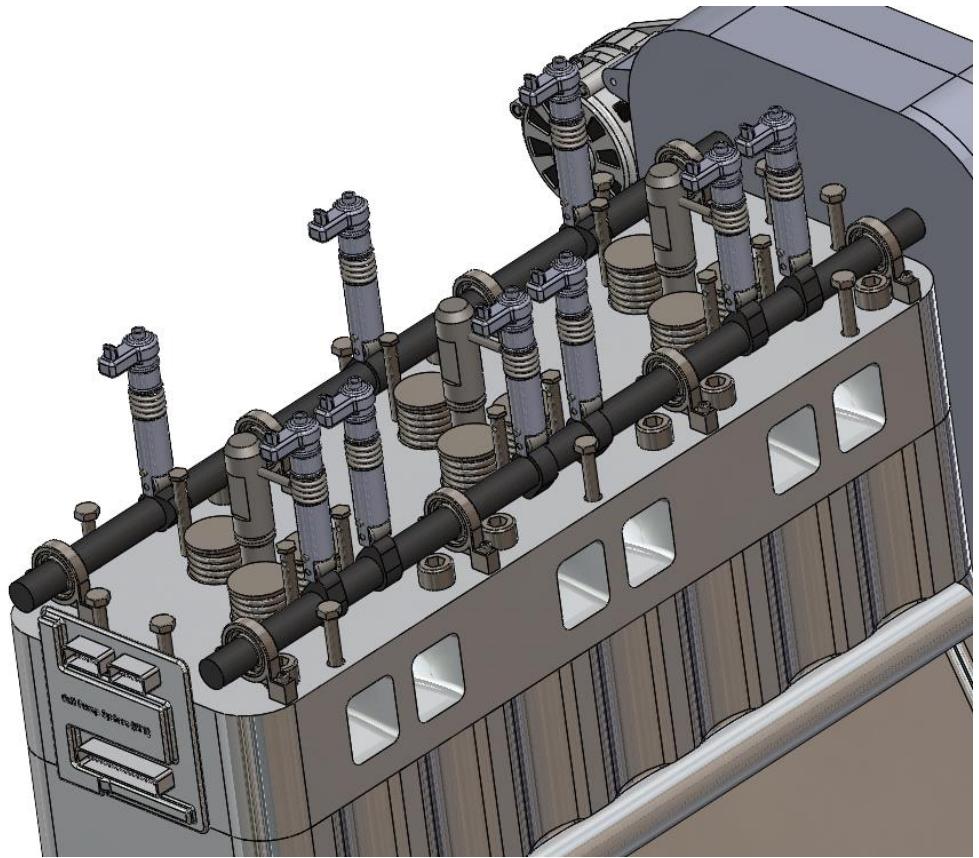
CAD of Assembly UPS, Valves, Valve Springs and Camshafts of The Engine.
